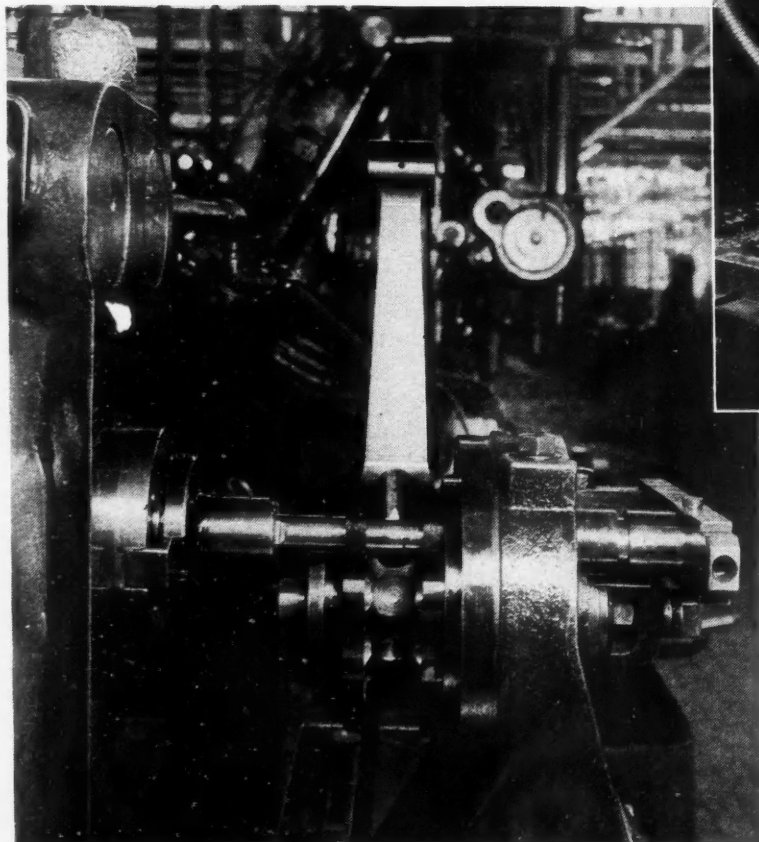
(Left) Master rod set-up on Milwaukee equipment for machining between flanges to provide clearance for the head of the articulated rod. Note the effect just below the arbor of a previous operation countersinking the formed counterbore with a drill press. The flycutter shown here is being used as a roughing tool. After the roughing operation, a formed flycutter is passed through, then reversed, in order to blend in flanges with the clearance groove. The outer arbor bushing fits into reamed holes in the master rod.
